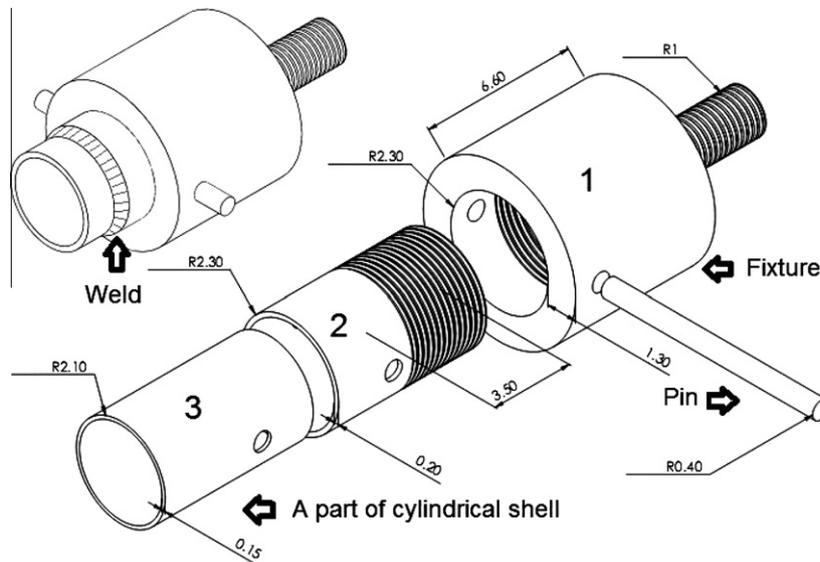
Schematic of the cylindrical shell connected to the fixture using welding, threading and pin (dimensions are in cm).
